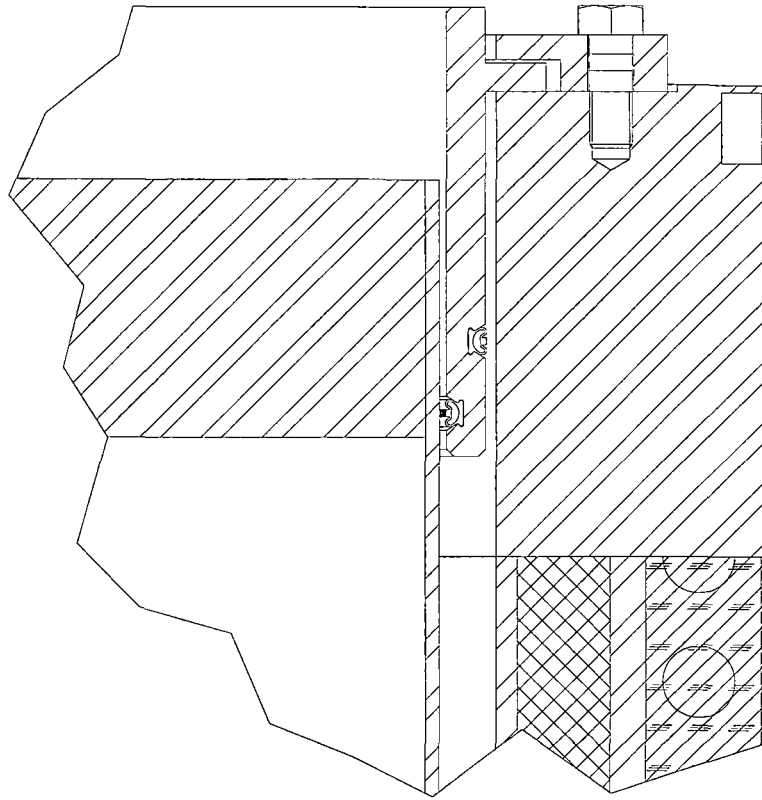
PMTC/TSC Model – Shield/Seal Insert Assembly
